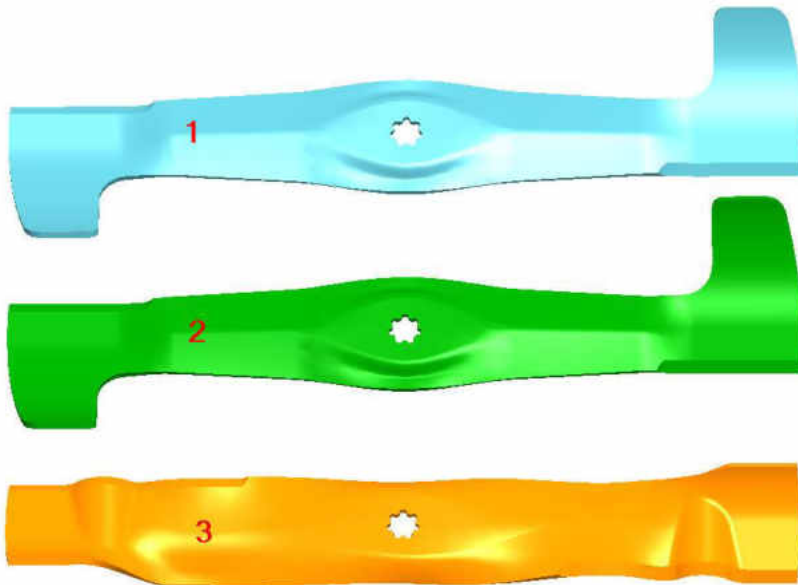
Mower blade designs. 1) J-wing design with a 33mm wing height and a 115mm wing length. Used in virtual and engineering field tests. 2) J-wing design with a 43mm wing height and a 115mm wing length. 3) 3-n-1 blade design with a 33mm wing height and a 76mm wing length.
